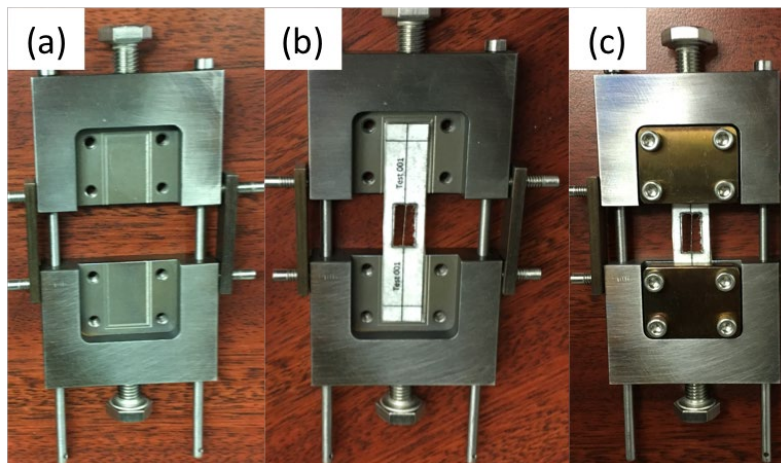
Tensile fixture (a) without sample (b) with sample (c) with sample clamped in place.
